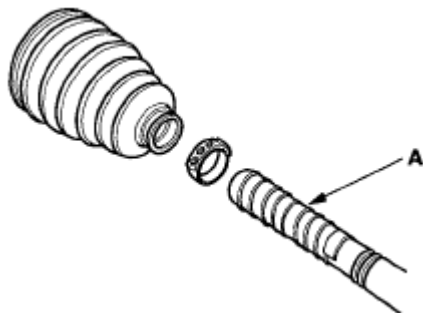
Identifying Driveshaft Wrapped With Vinyl Tape
